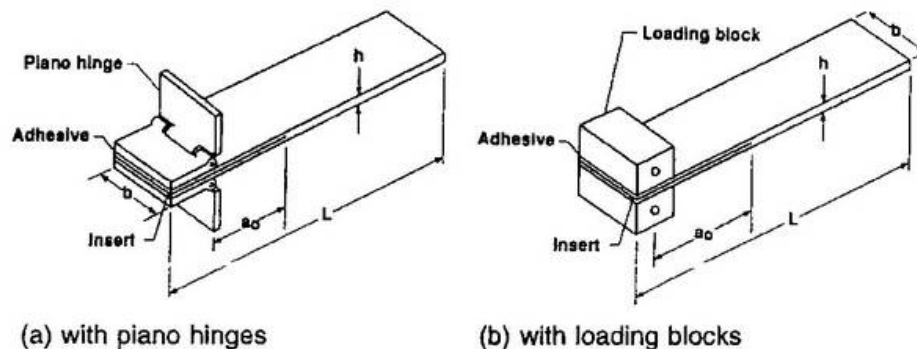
Double cantilever beam (DCB) specimens [178]
